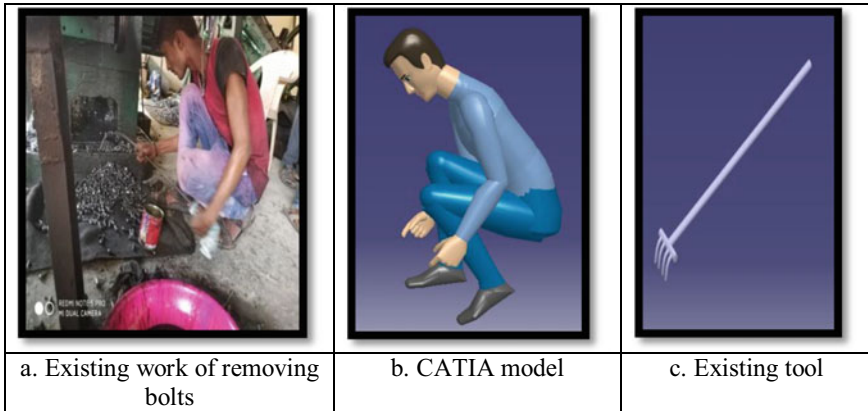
a Operator removing bolts from the machine with a tool, b CATIA model of existing posture and c Existing tool used to pull the bolts from beneath the machine
